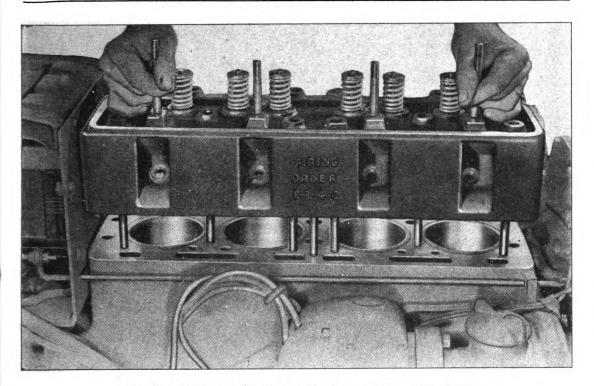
Removing Cylinder Head by Lifting Straight Up
